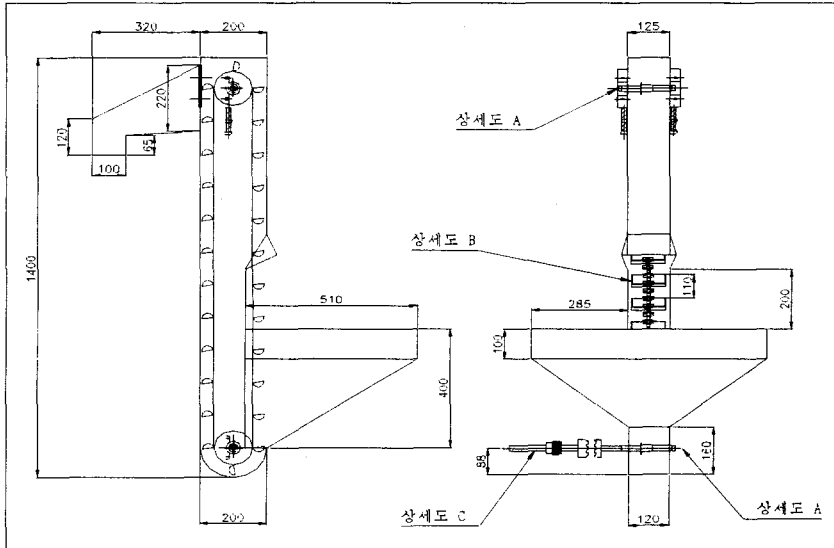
Design drawing of bucket elevator in developed garlic separator.
